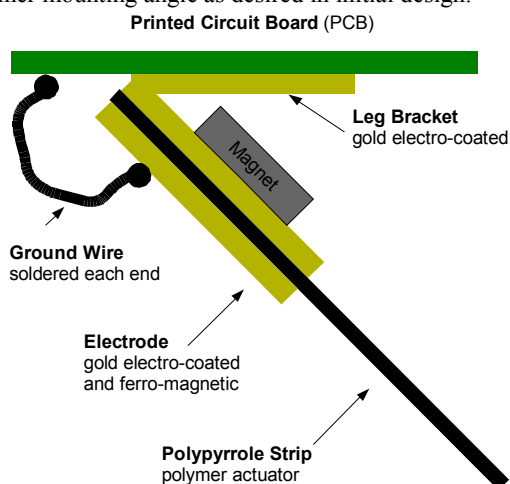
Illustration of the polymer actuator connection to the printed circuit board.
